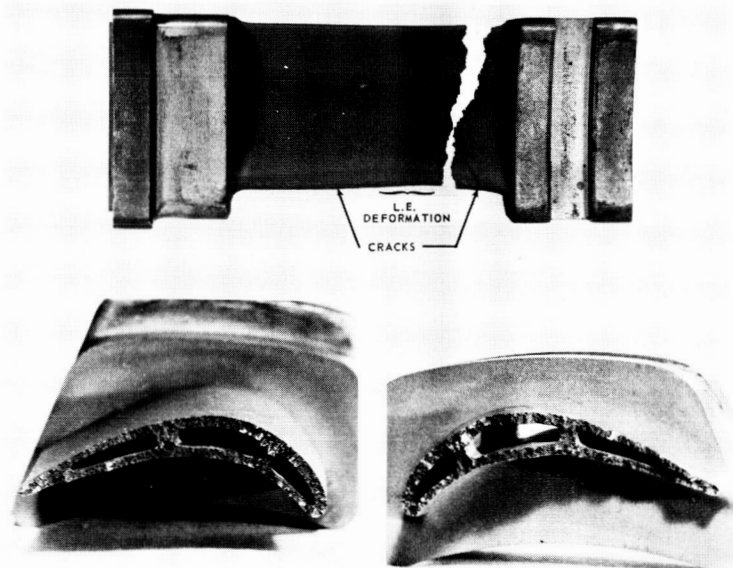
PWA 663 Convectively Cooled Blade Specimen After Test No. 2
